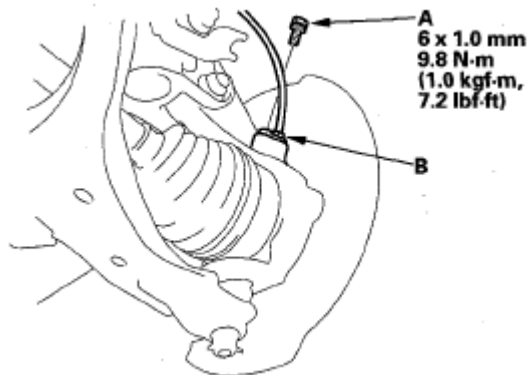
Identifying Wheel Sensor With Flange Bolt And Torque Specification
